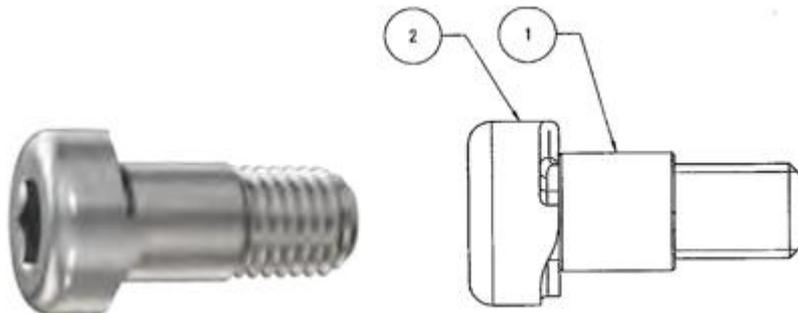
Image of the plateau screw (left); technical drawing of the plateau screw (right): component 2 – screw, component 1 – bushing
